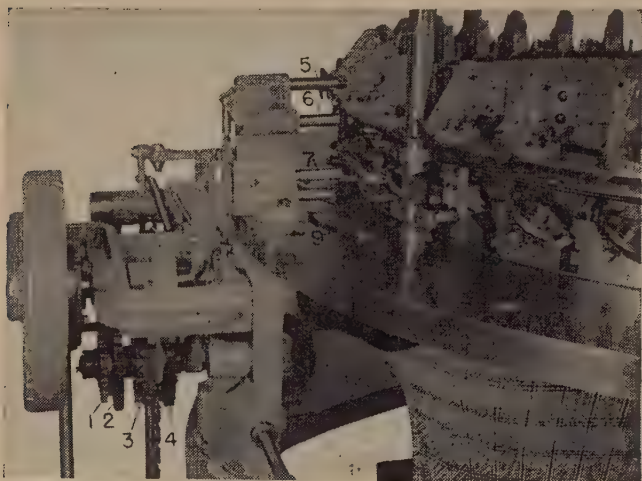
Close-up view of Brinton selective striping machine showing automatic control mechanism.
